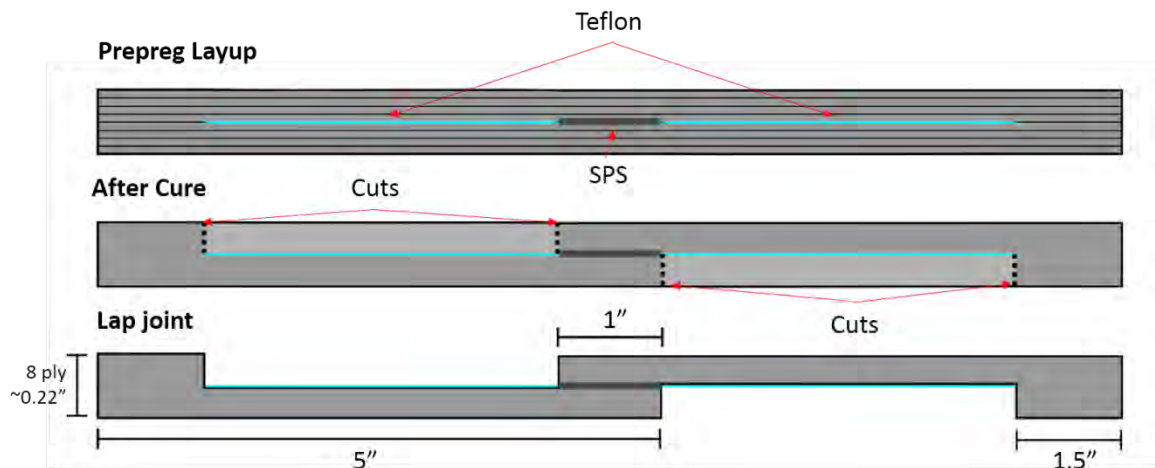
Single-lap joint fabrication illustration and specimen dimensions.
